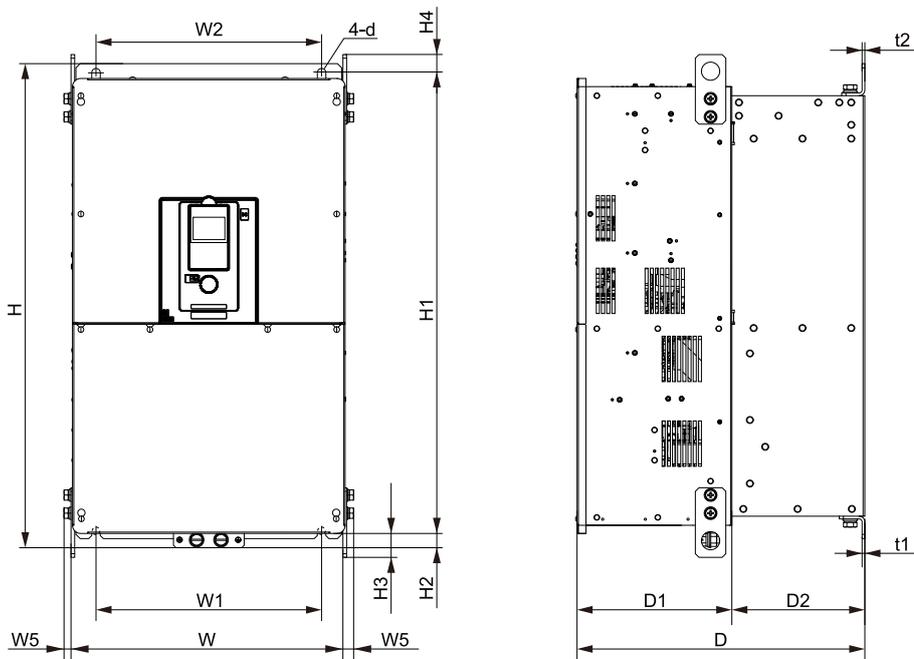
Exterior and Mounting Dimensions Diagram 8
